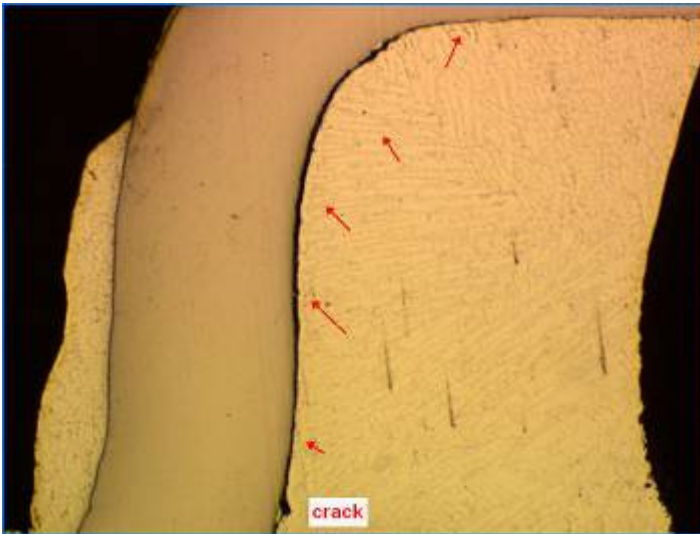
cross section, SN62, U61, left lead solder crack and voids, 200x b
